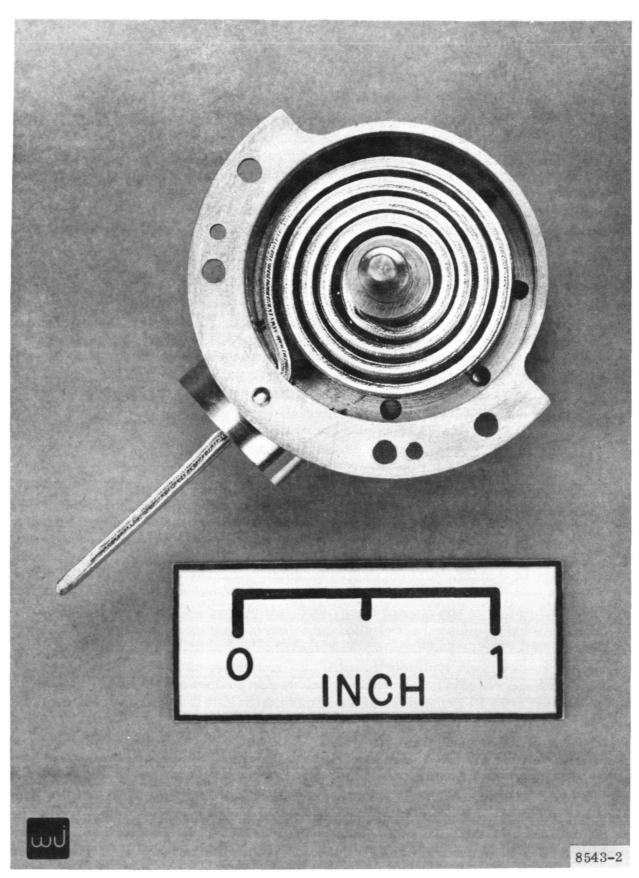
End view of the thermostatic motor assembly with the end bearing plate removed. The spiral bimetal thermostatic motor element is shown.
